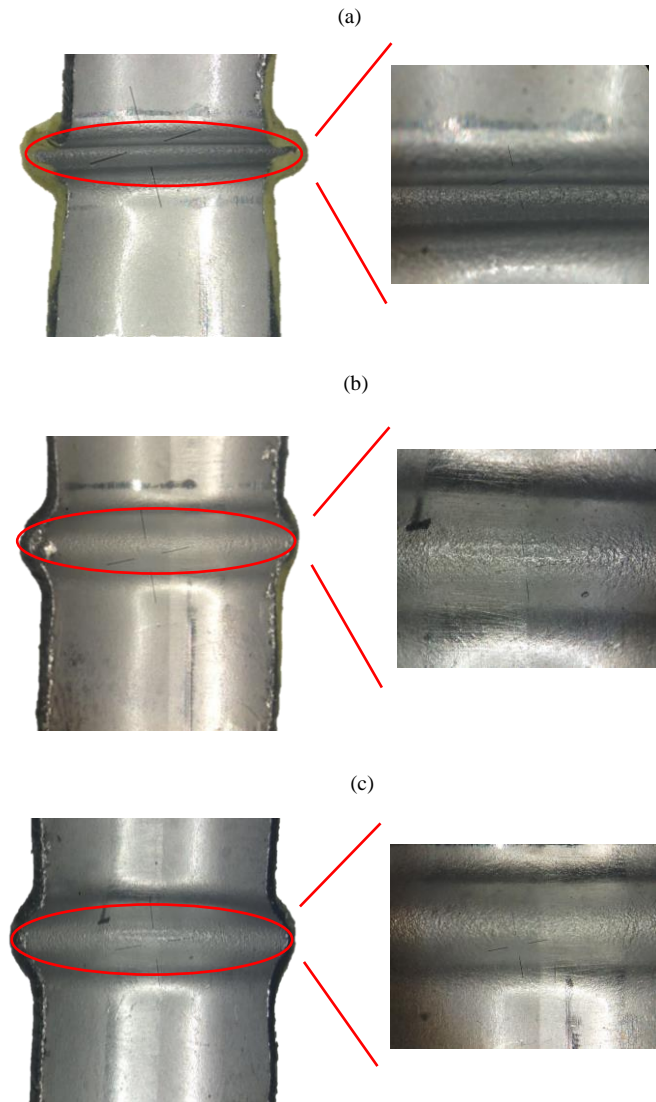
View of the inner surface of the bead through a stereomicroscope. (a) Case 11, (b) case 14, (c) case 16.
